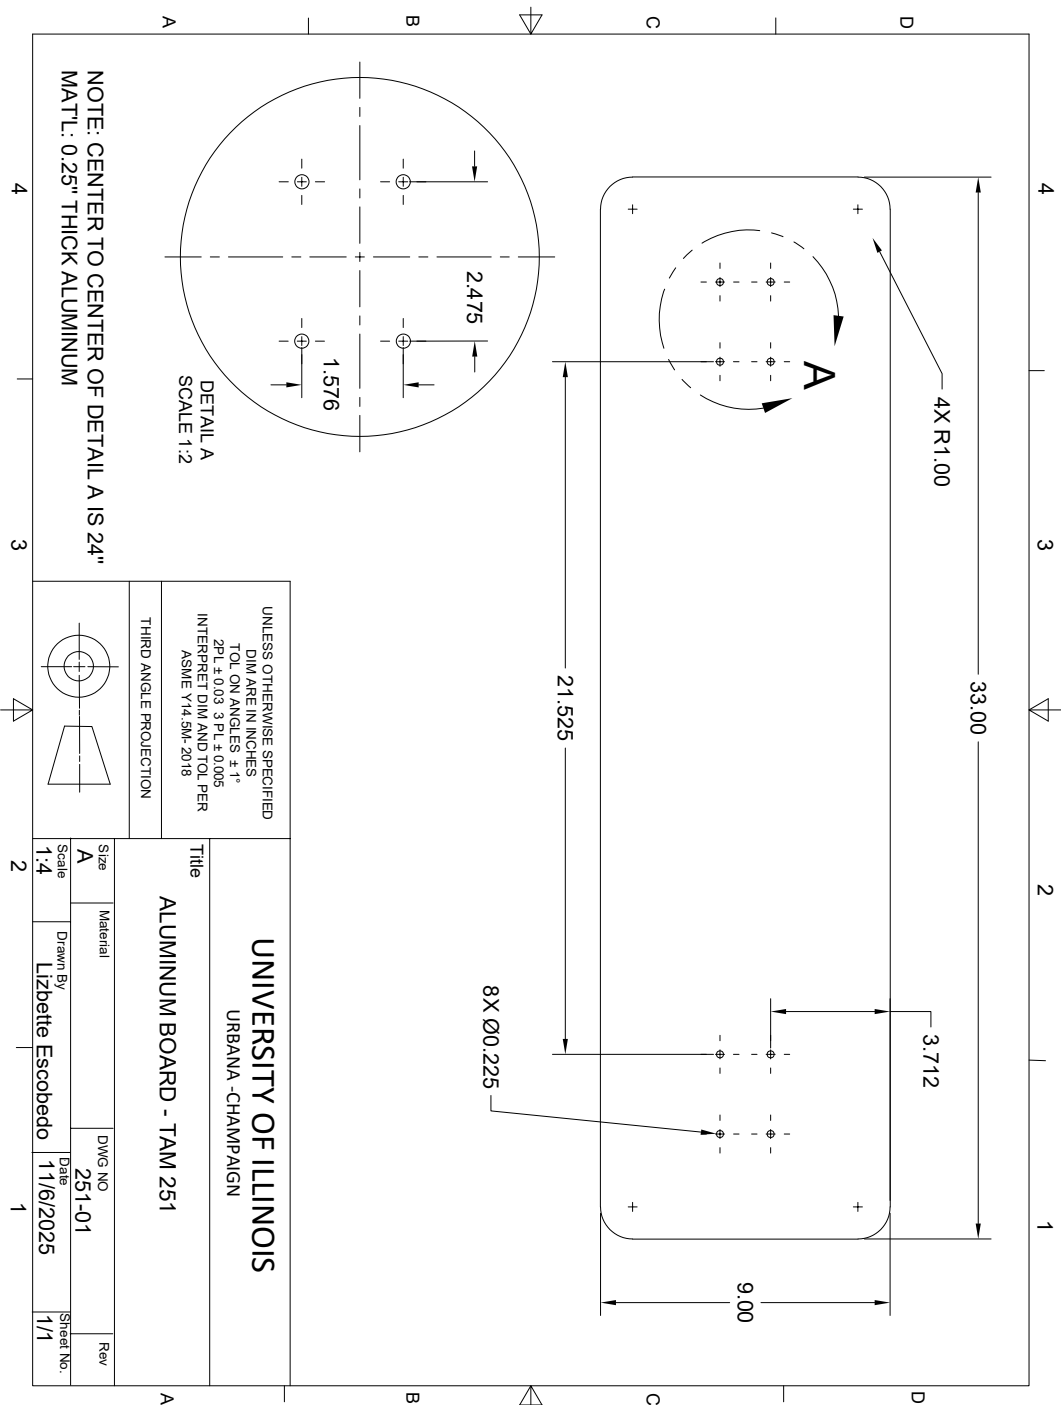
Solid Mechanics Demonstration: Aluminum Board Drawing
